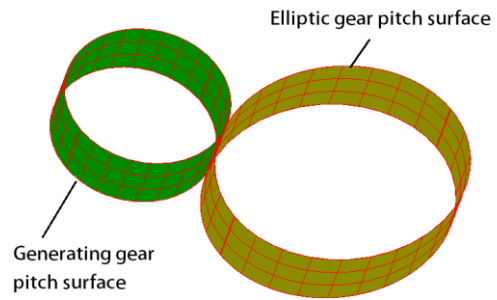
Basic principle of generating elliptic gear with cylindrical gear shaper cutter
